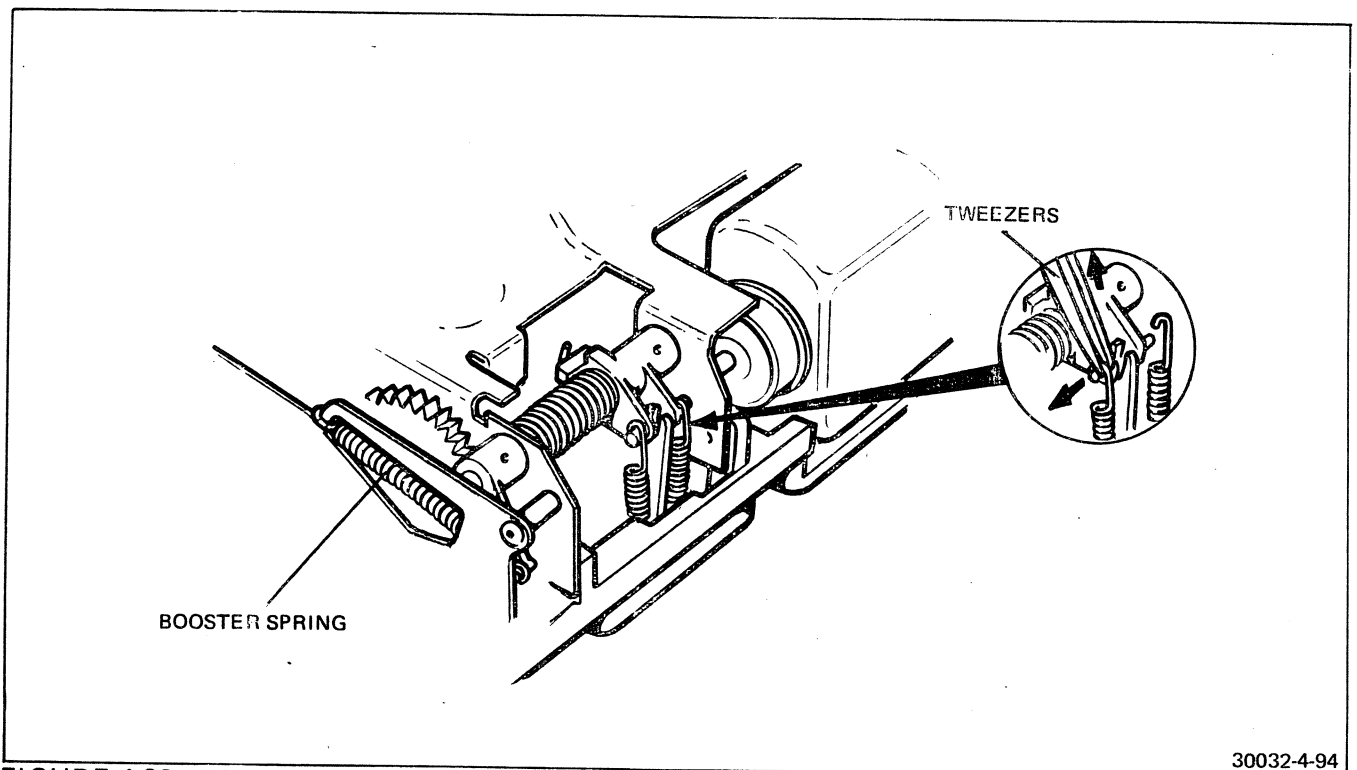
REMOVING OVERRIDE SPRINGS
